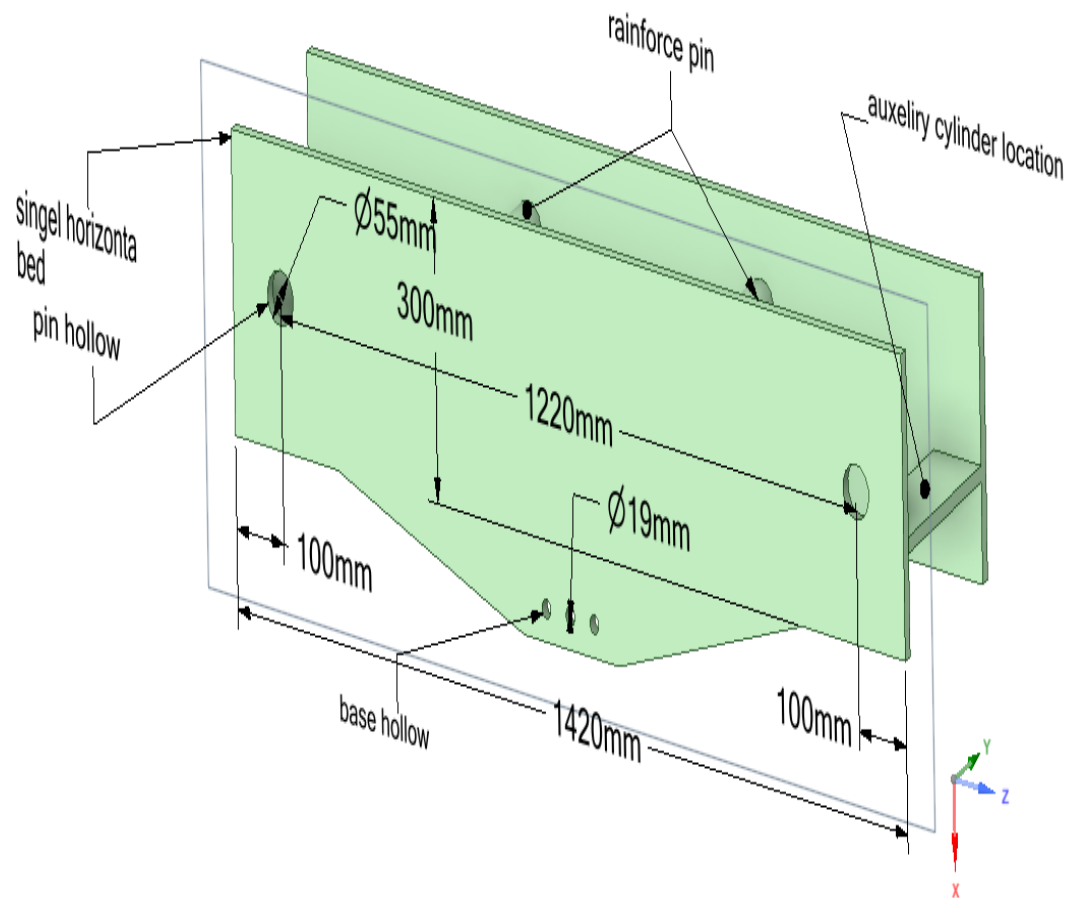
27.View of 3D model spaceclaim (horizontal bed assembly).
